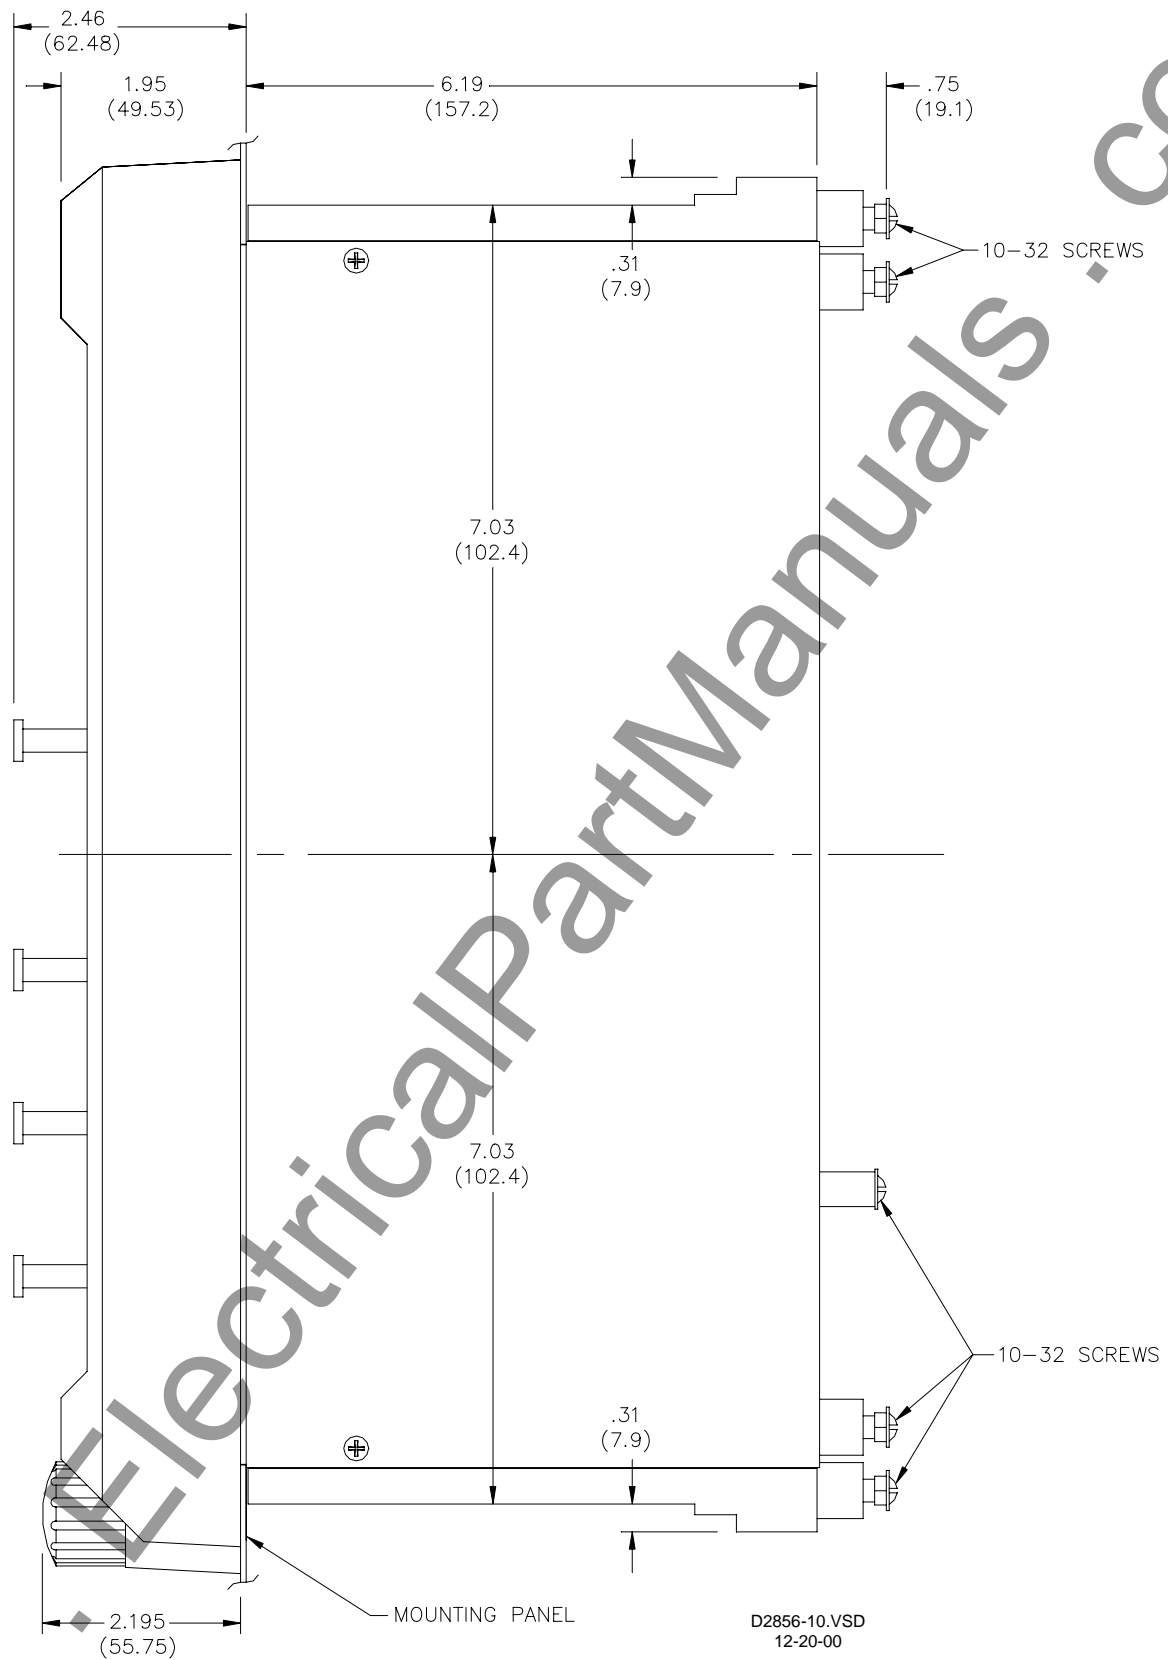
M1 Case, Semi-Flush Mounting, Outline Dimensions, Side View
